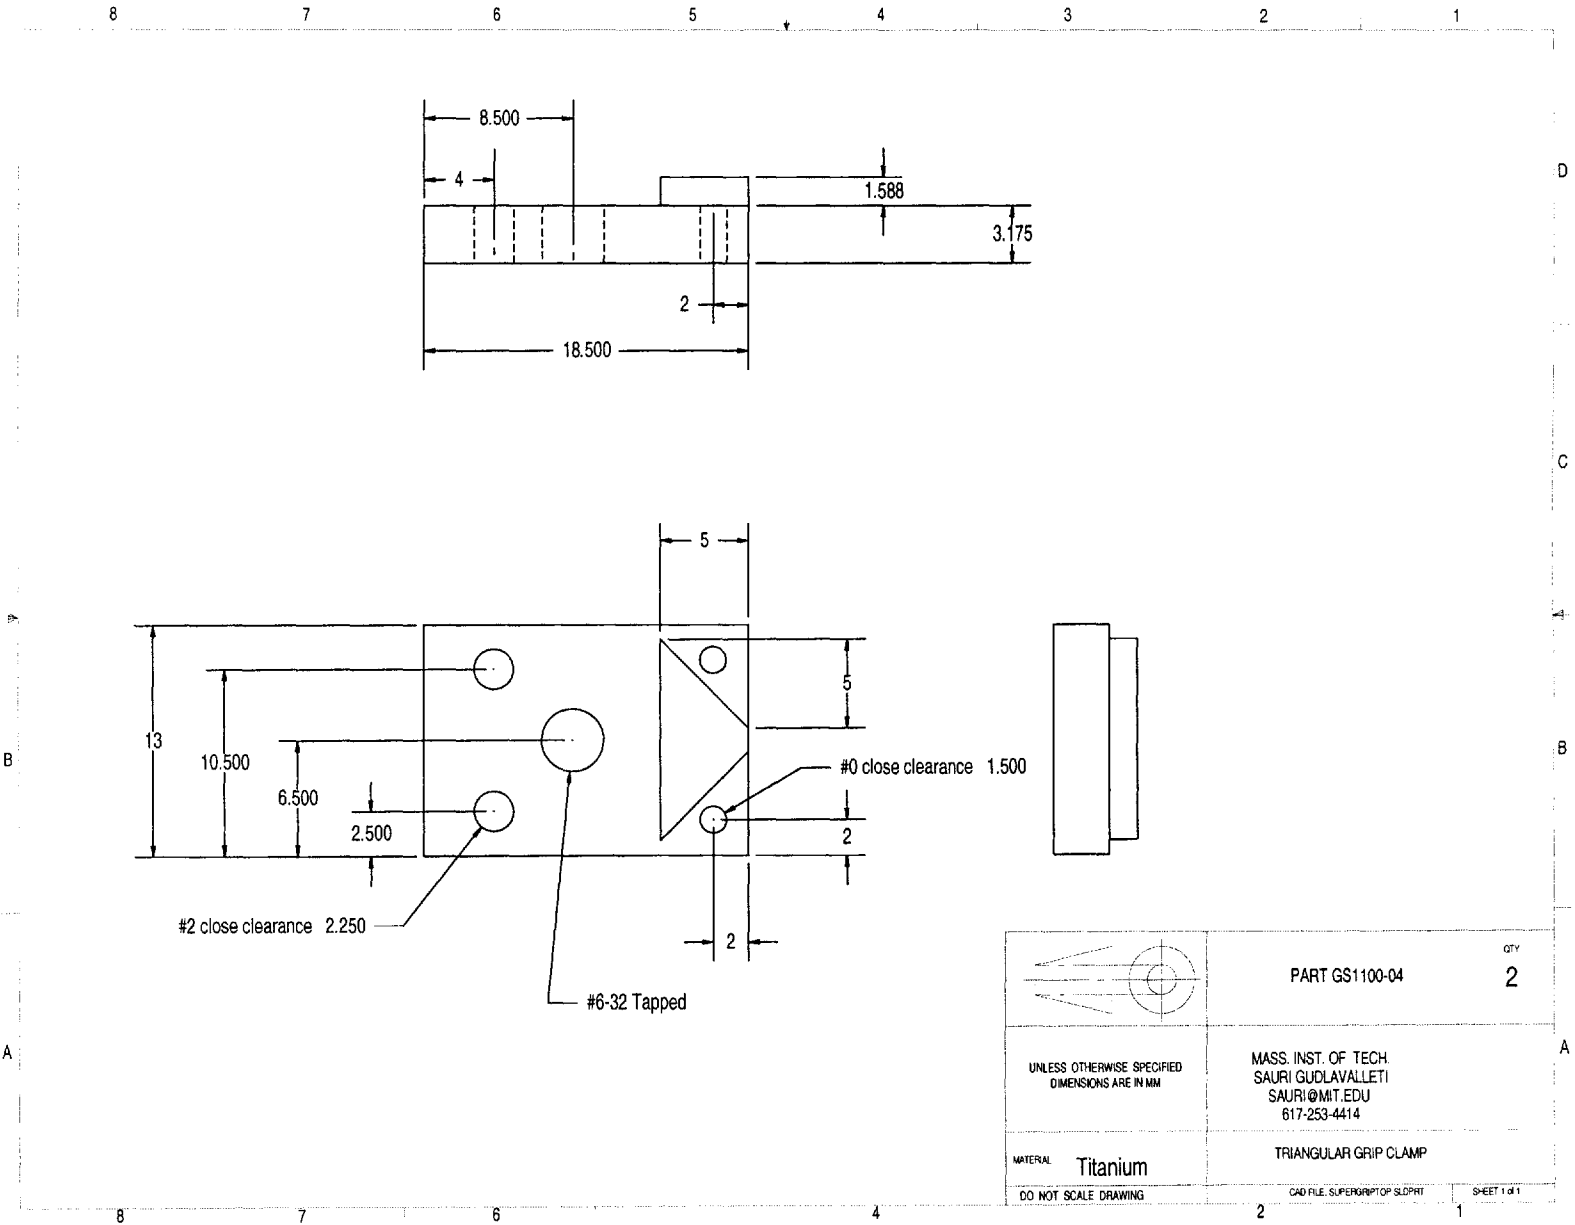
Part GS 1100-04. Clamp for bowtie shaped tension specimen. These grips need to be used in association with Part. GS1100-01 or GS0601-01. Ref. Fig. 4-4 for an assembly drawing.
